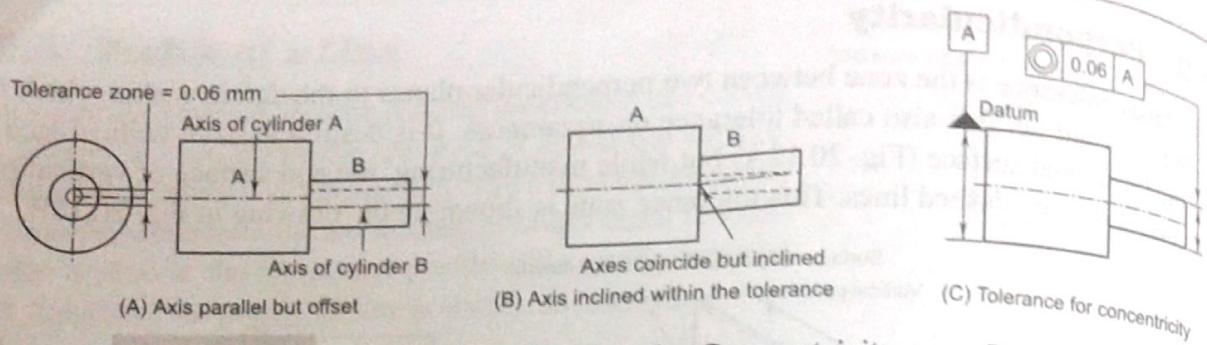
Indicating Tolerance for Concentricity on a Drawing
